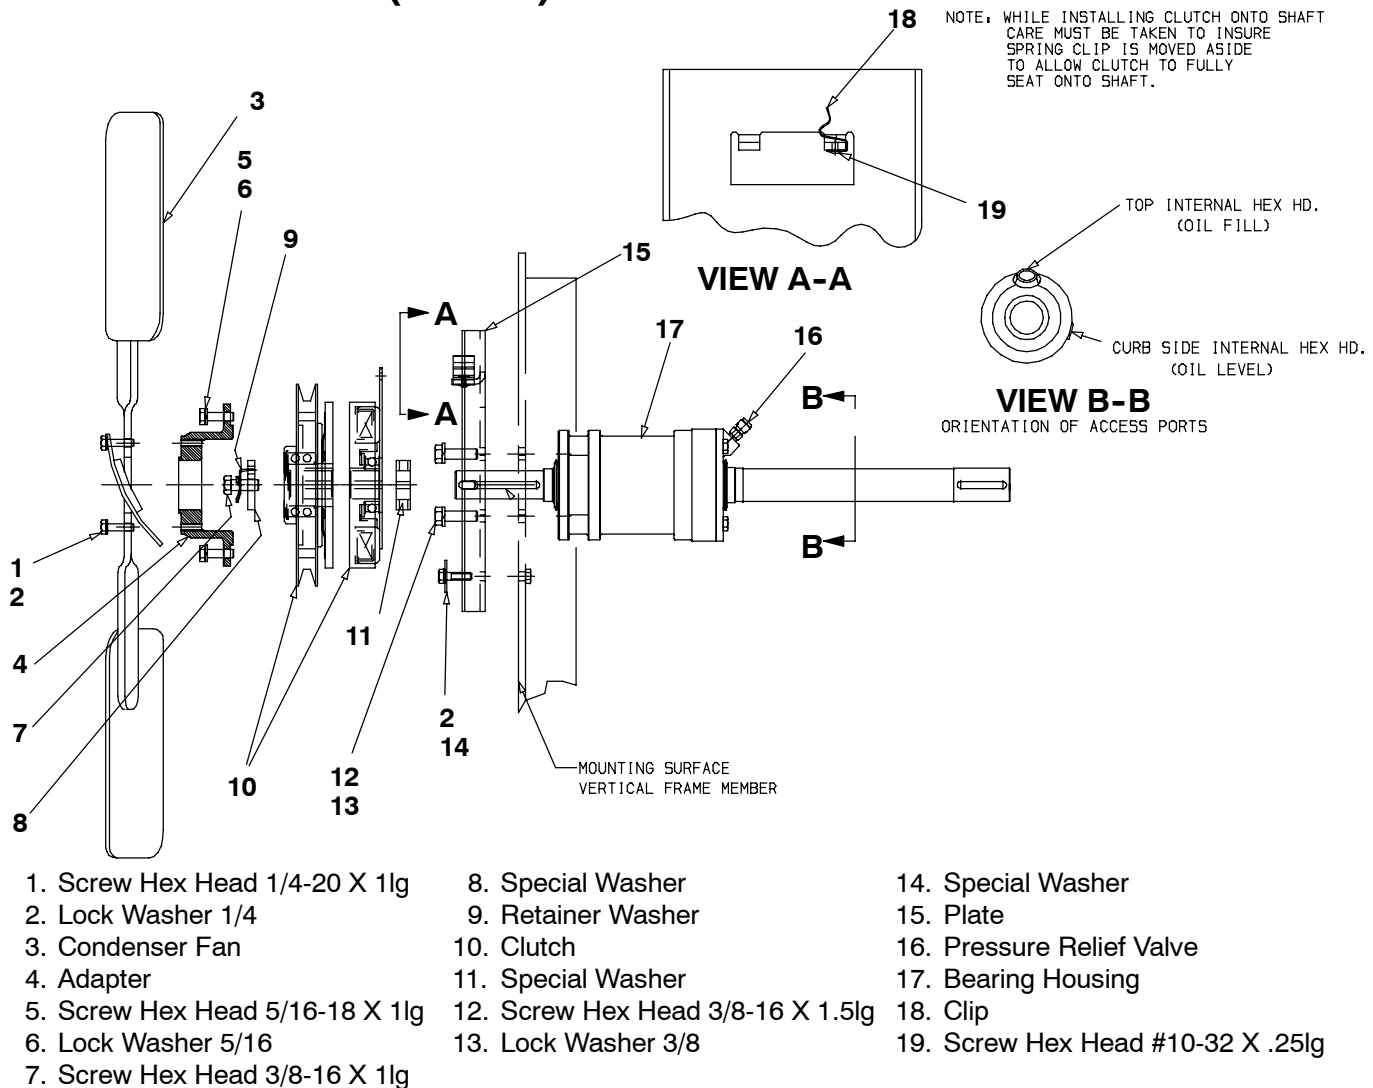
Evaporator/Condenser Fan Shaft Assembly (Ultima)
